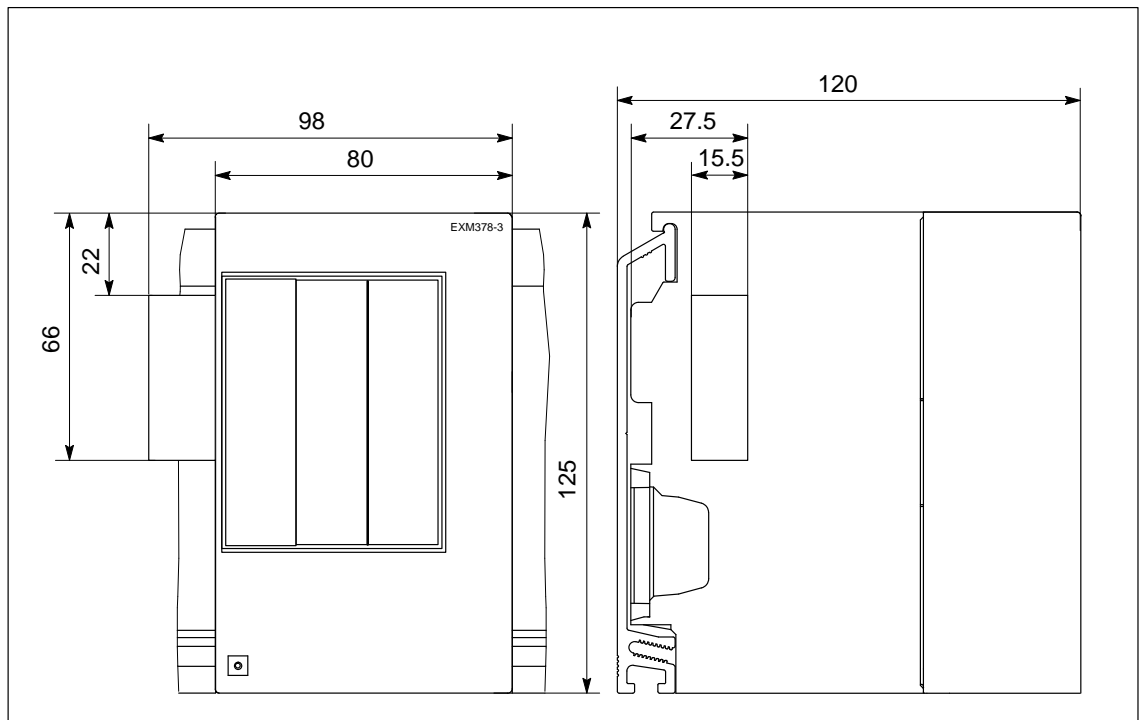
Dimension Drawing of Expansion Module EXM 378-3
